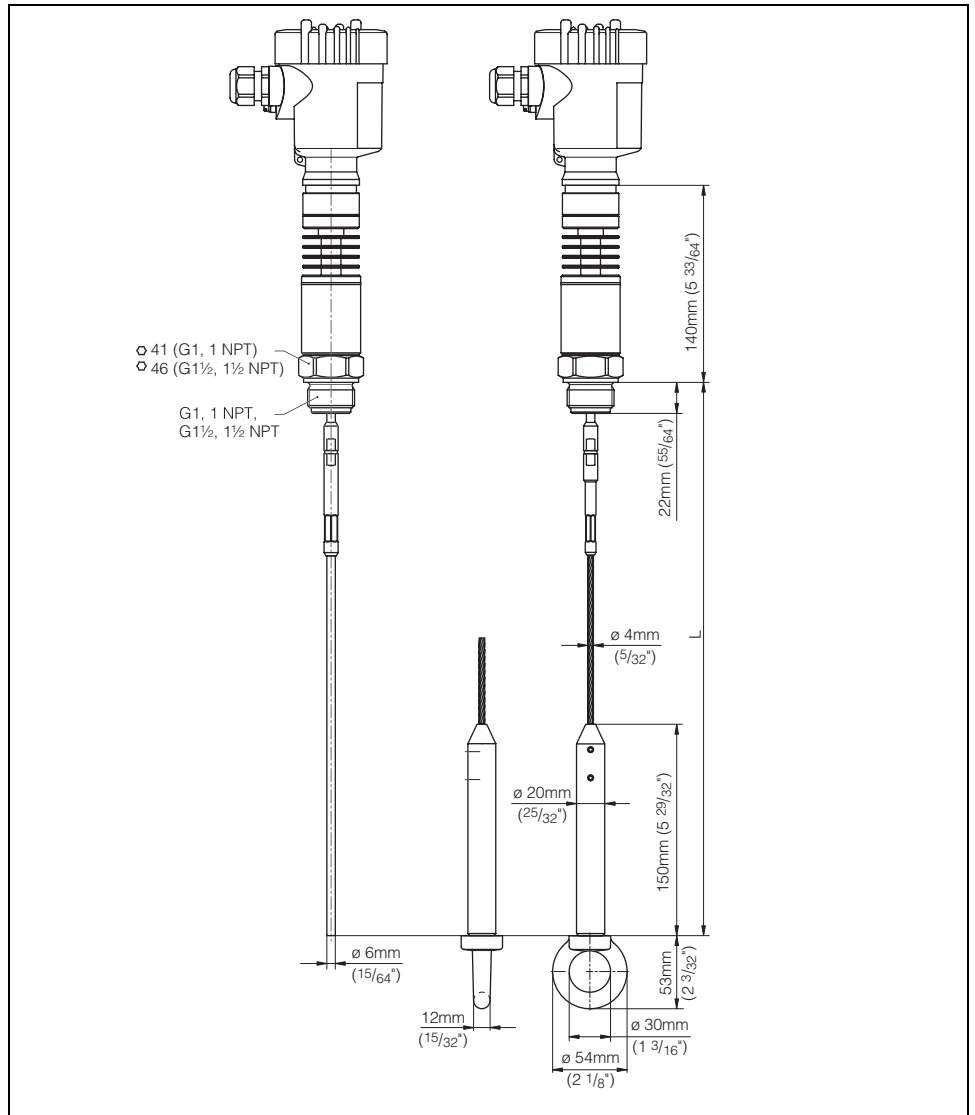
VEGAFLEX 66 - Cable and rod version with thread
